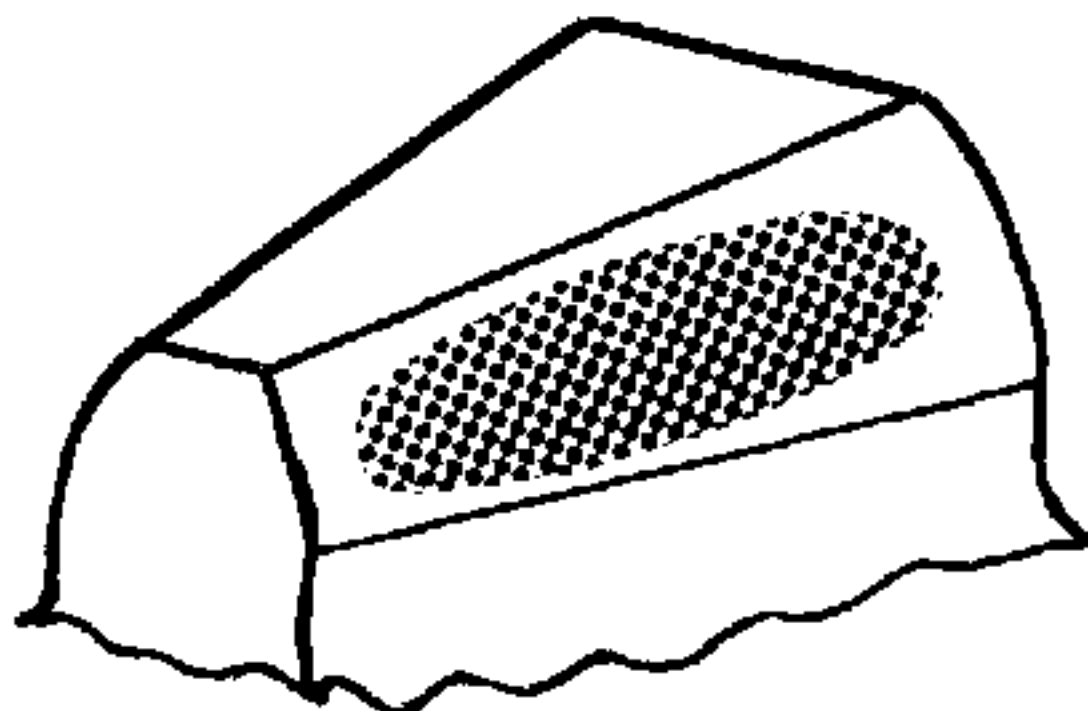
E. Elongated Ring Gear Tooth Contact Pattern.
